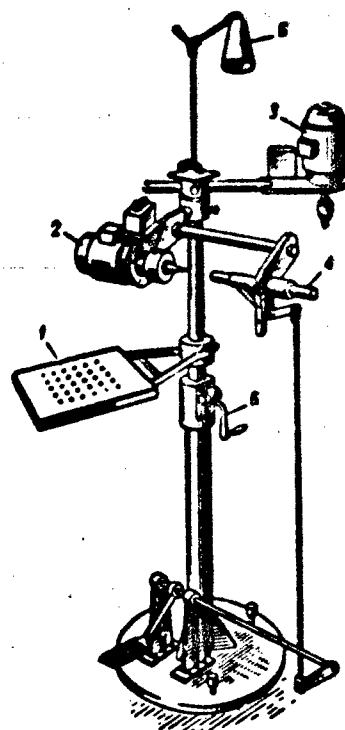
General-purpose machine tool for machining various plastic components: 1) Bench; 2) electric motor; 3) electric motor with chuck for drilling; 4) pressure roller; 5) lamp; 6) foot pedal.
